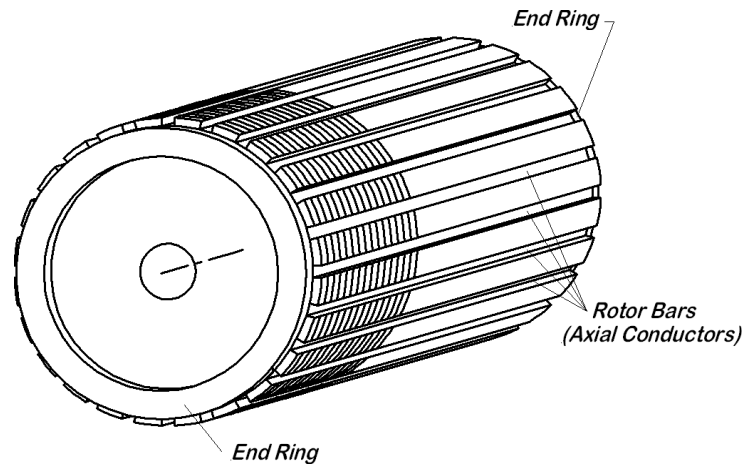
Squirrel Cage Induction Motor Rotor Including End Rings
